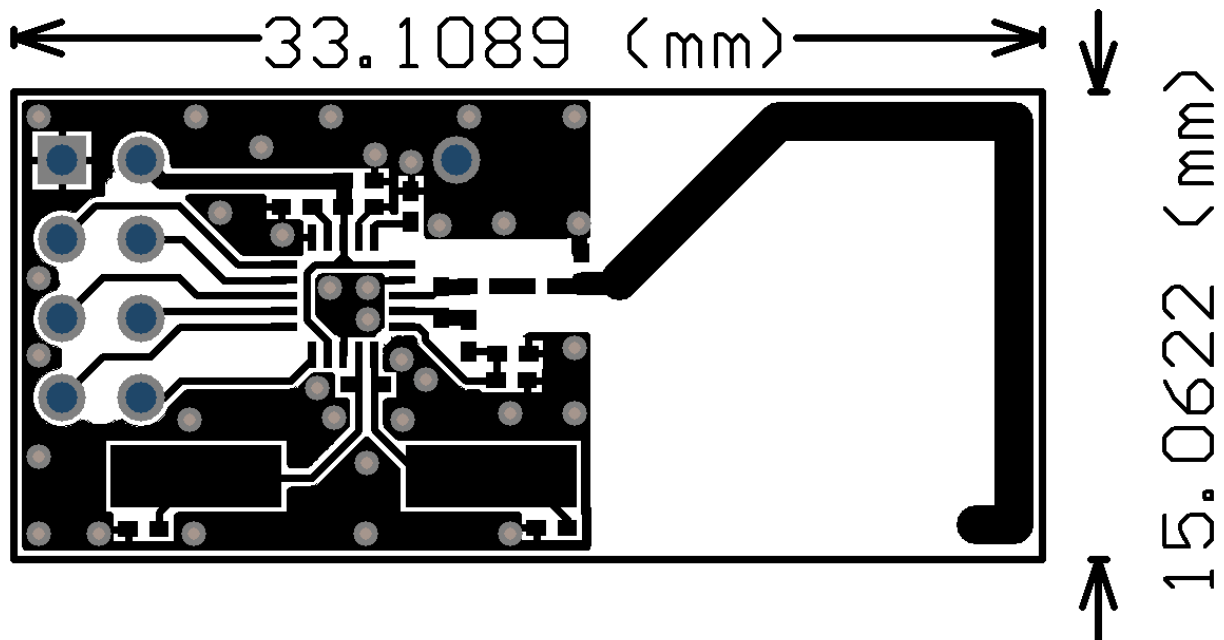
Top layer (nRF24L01+ RF layout with single ended connection to PCB antenna and 0402 size passive components)
